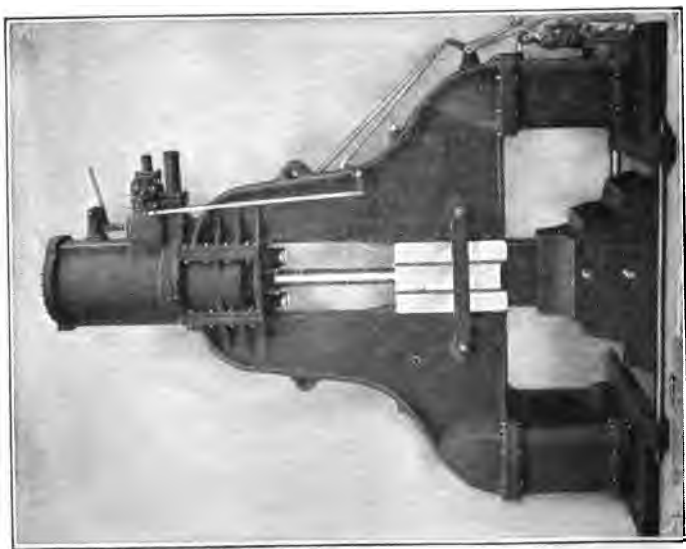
LARGE DOUBLE-FRAME STEAM HAMMER
